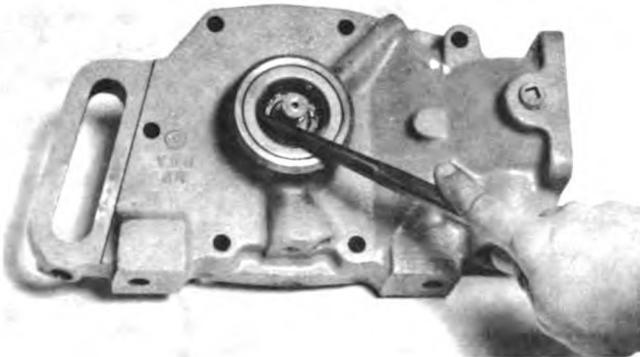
(N10877). Remove The Seal From The Housing.
